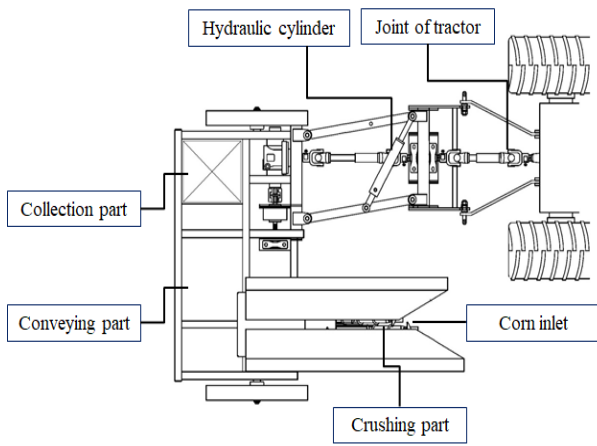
2D model of edible fresh corn harvesting machine with major components.
